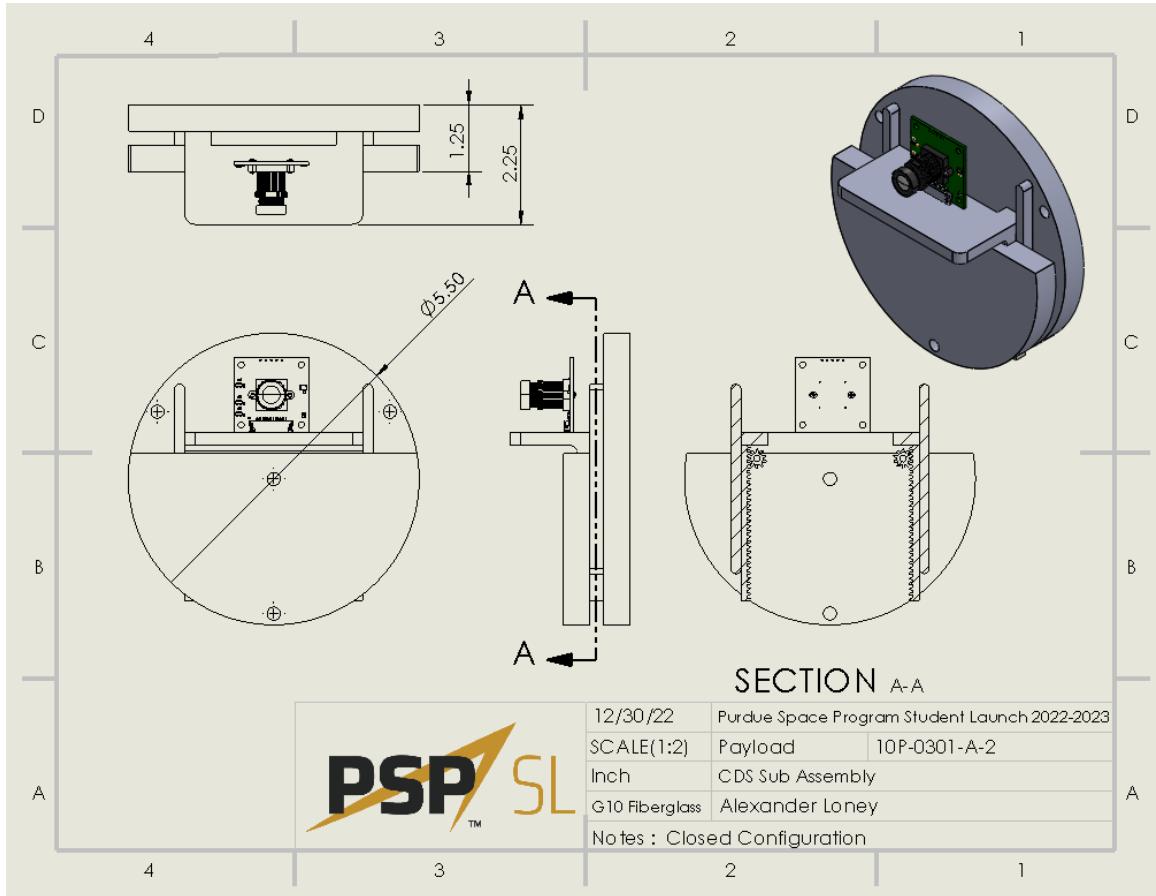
CDS Sub Assembly Technical Drawing
